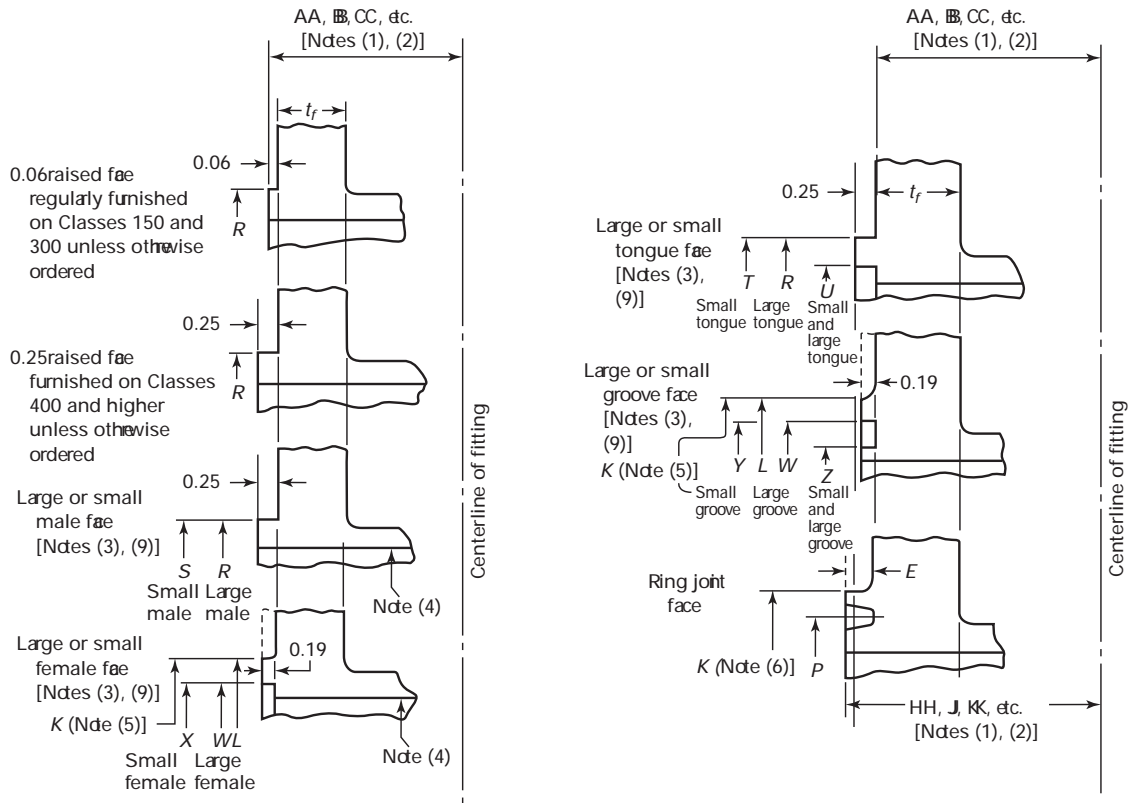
ASME B16.5 – End flange facings [inch] and their relationship to flange thickness and Center-To-End and End-To-End dimensions
